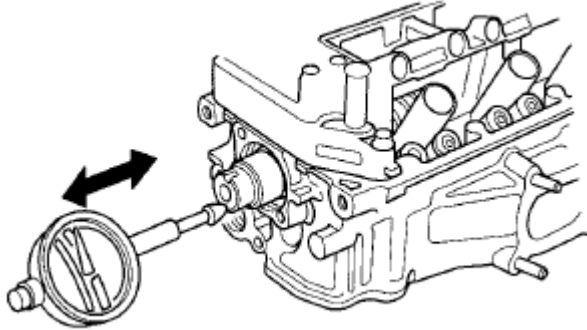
Inspecting Camshaft Using Dial Gauge
